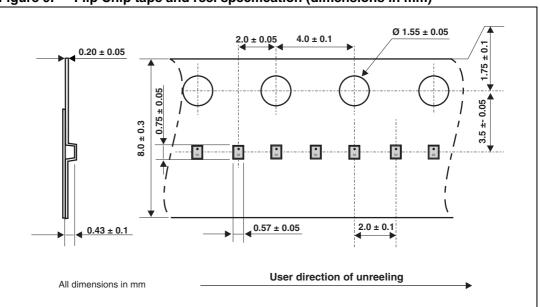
Flip Chip tape and reel specification (dimensions in mm)
